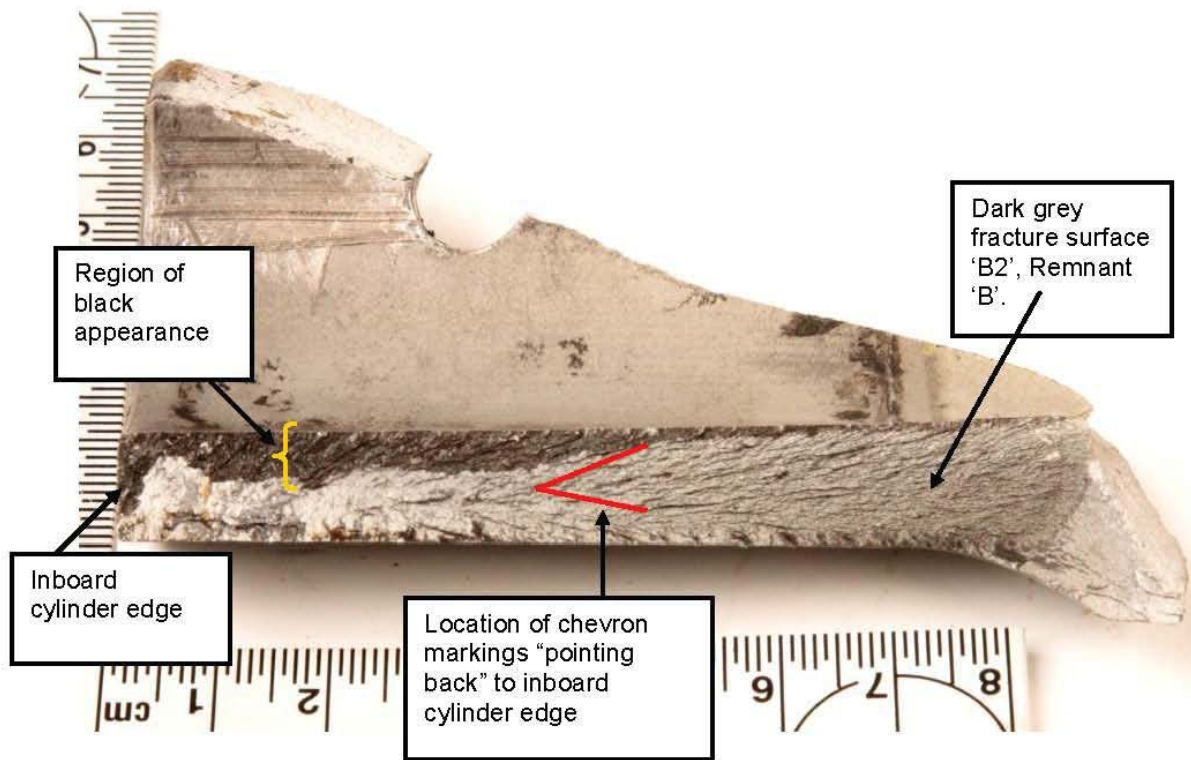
Showing the as received remnant 'B' of the undercarriage cylinder and fracture surface 'B2'.
